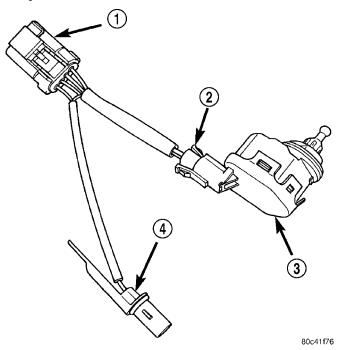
LAMP WIRE HARNESS JUMPER - EXPORT
